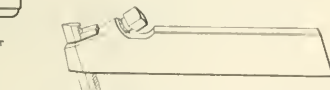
Threading Tool-holder with Adjusting Screw for Cutter.
